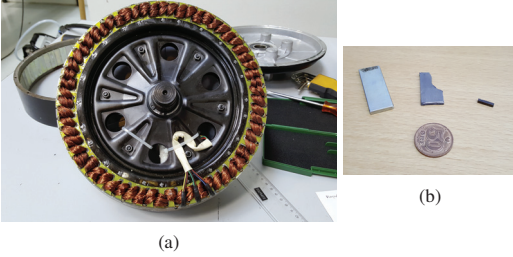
(a) Disassembly process, (b) Magnet samples.
